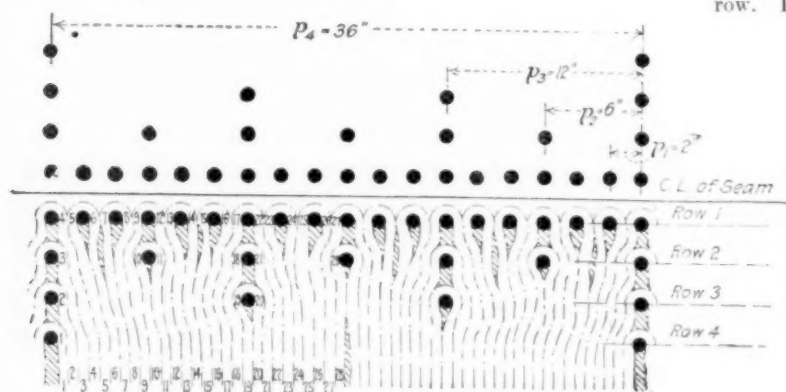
LAYOUT OF A QUADRUPLE-RIVETED BUTT JOINT
